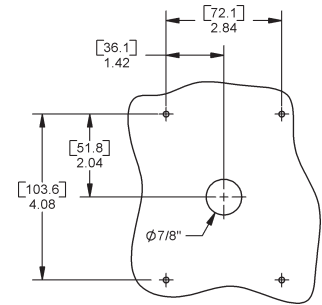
BAPI-Box enclosure mounting holes, rotate 90° for horizontal mount
